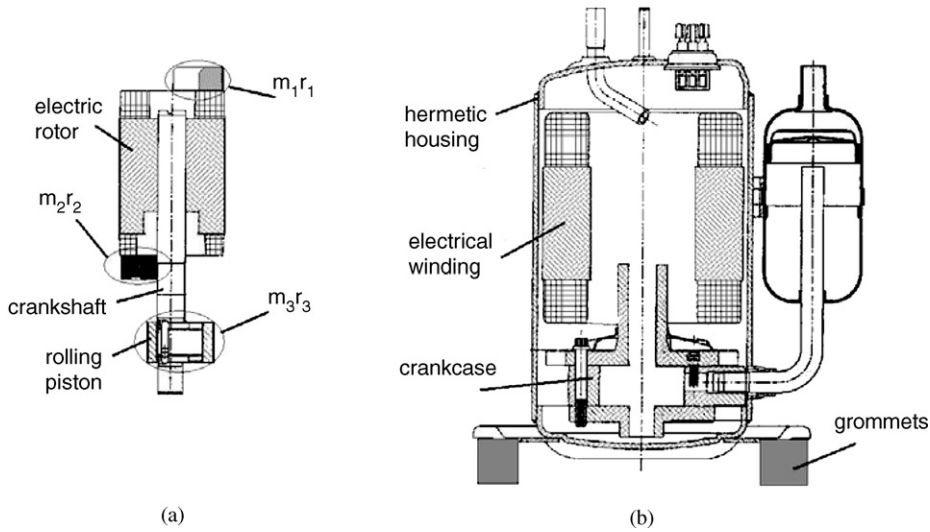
Rotor (a) and stator (b) of the rotary compressor.
